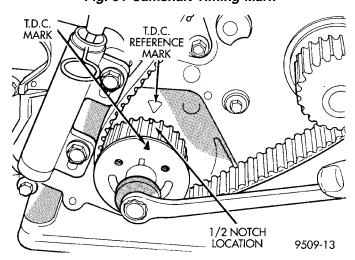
Adjusting Crankshaft Sprocket for Timing
